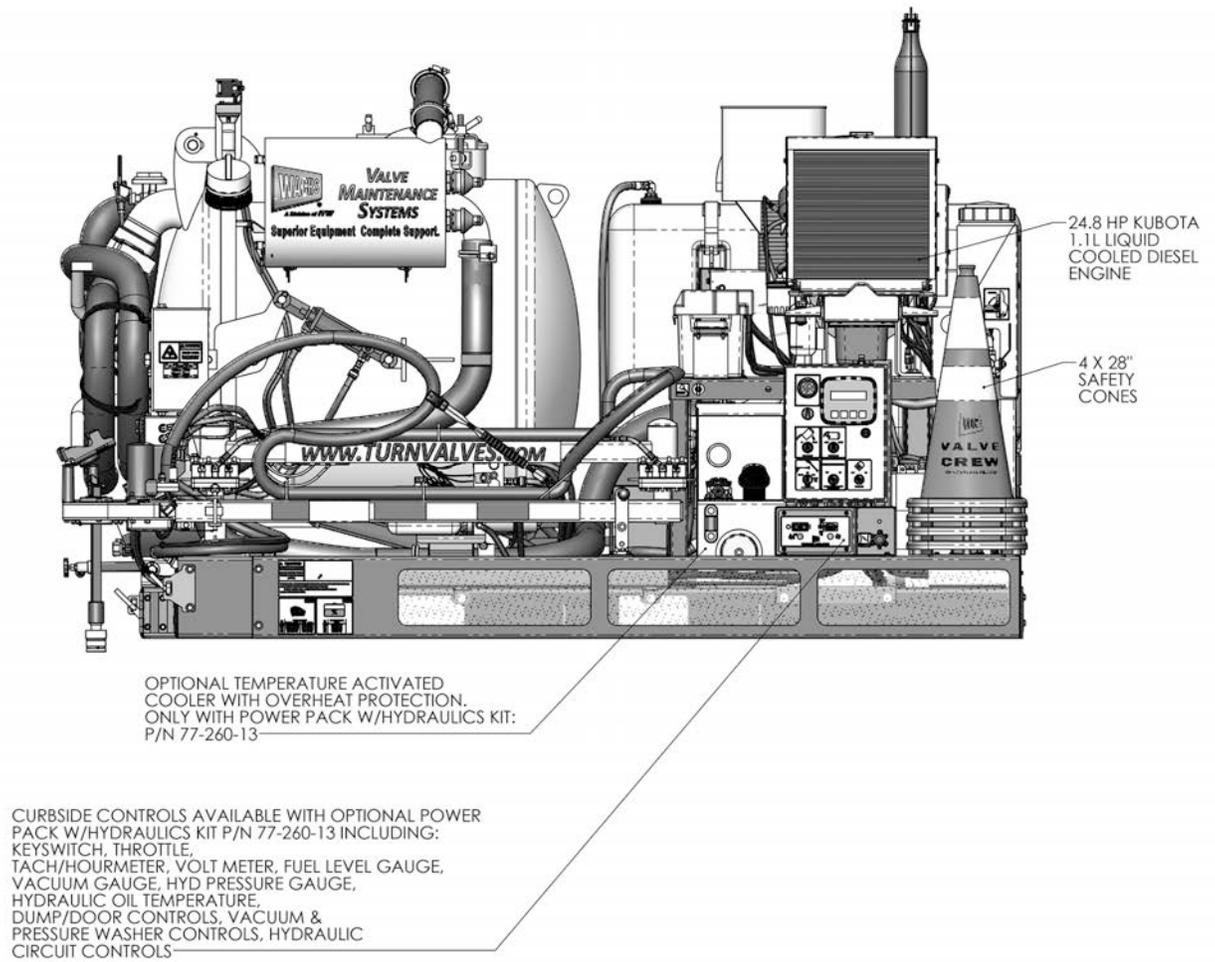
The drawing shows the controls-side view of the Standard Builder diesel engine configuration, 77-000-60.
